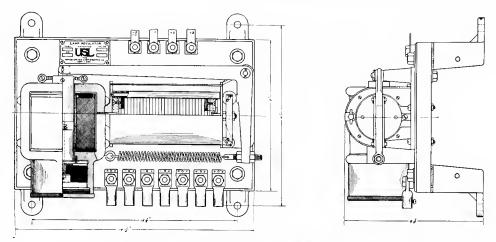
Type B-1 Lamp Regulator, for Mounting Inside Locker.
